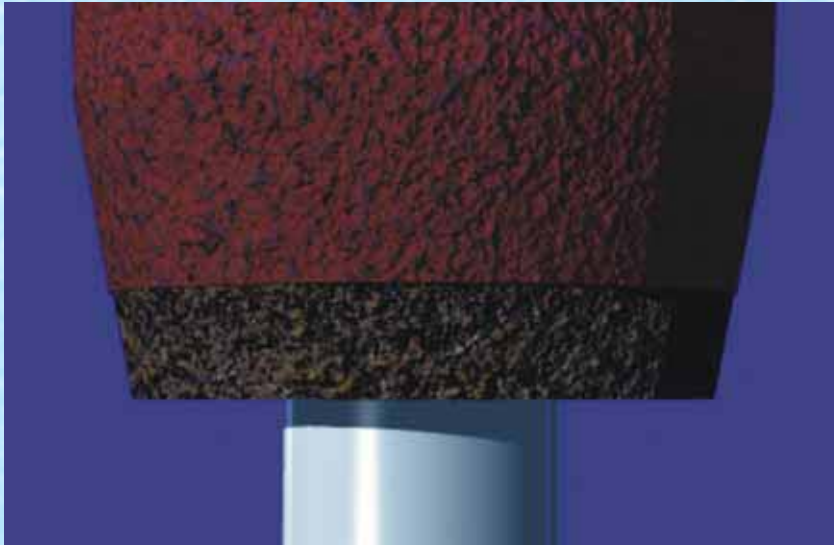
Sleeve located above a boss, which is smaller than the breaker core
